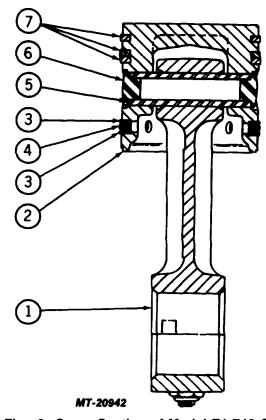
Cross Section of Model E1-740 Compressor Piston and Connecting Rod Assembly
